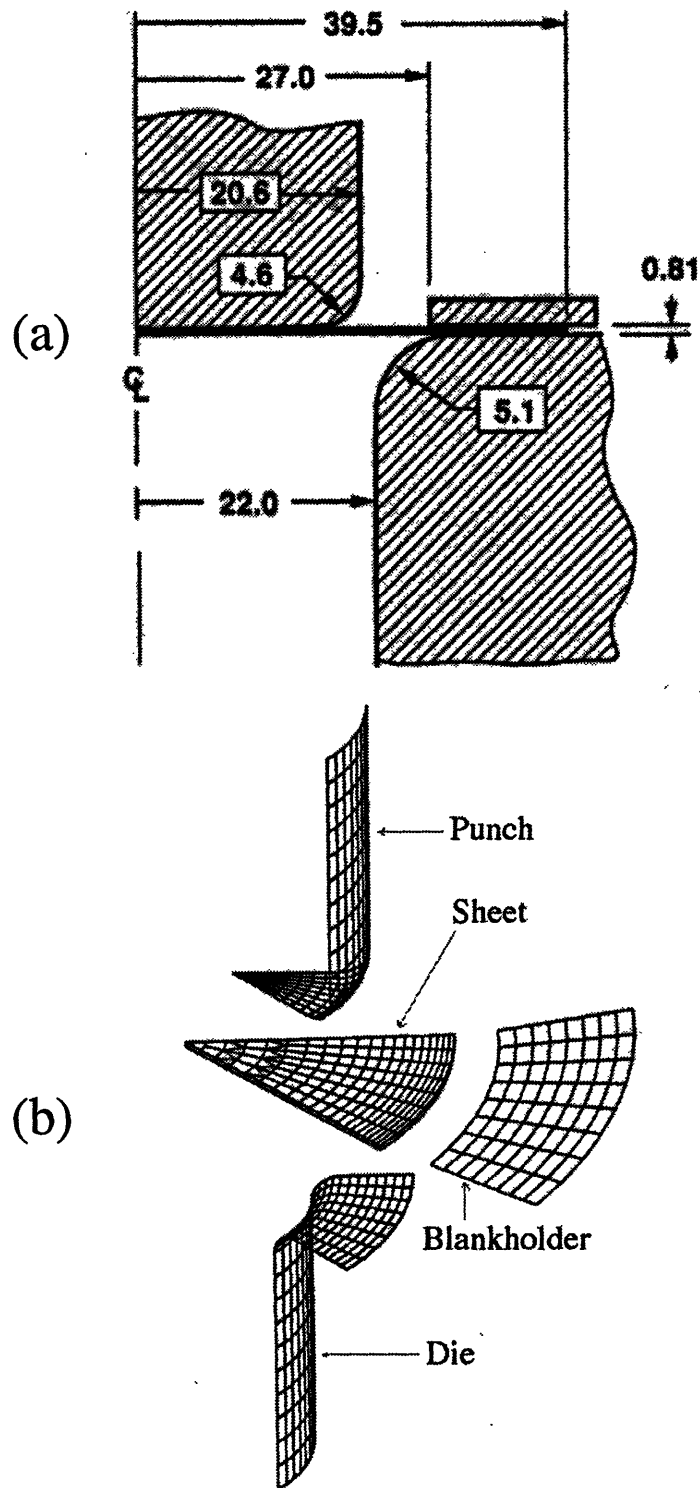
(a) Geometry for the single crystal drawing simulations [based on experiments done by Tucker, 1961] (b) Exploded view of the finite element mesh
